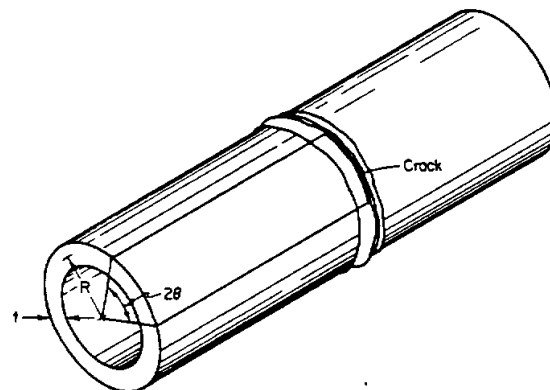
Circumferential crack in a pipe butt weld.
